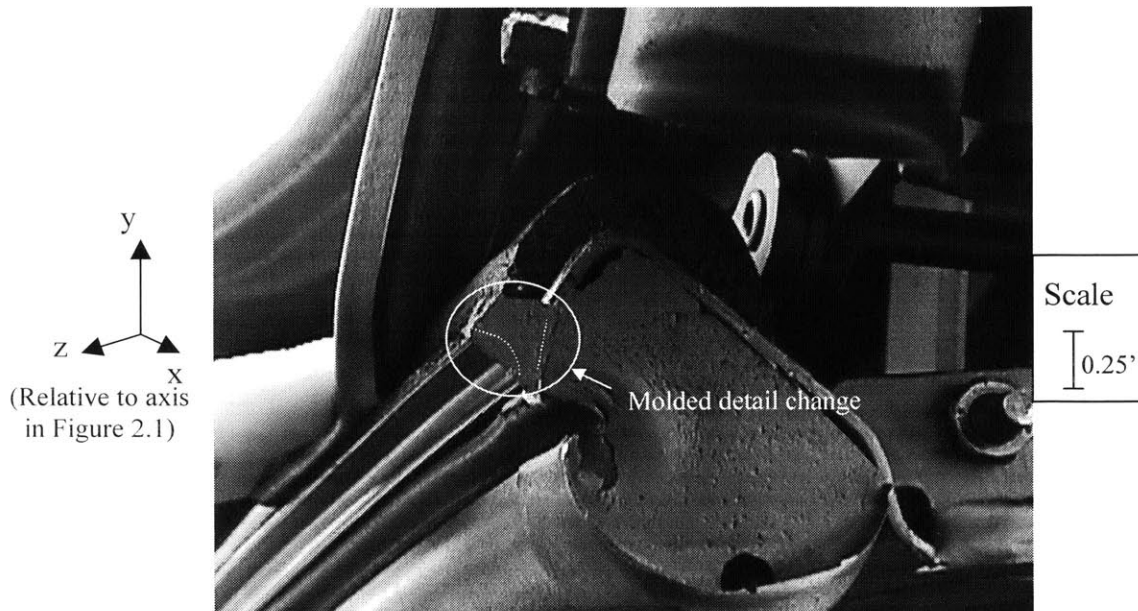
'B-Pivot' Molded Detail Mock-Up
